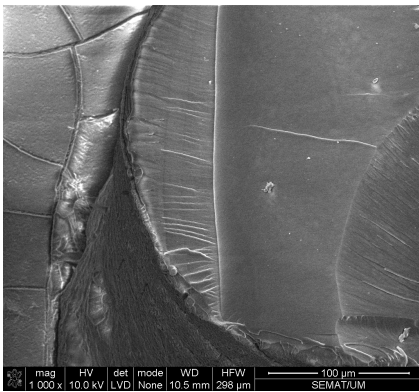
Top view of Pin 2, detailing the secondary fracture surface
